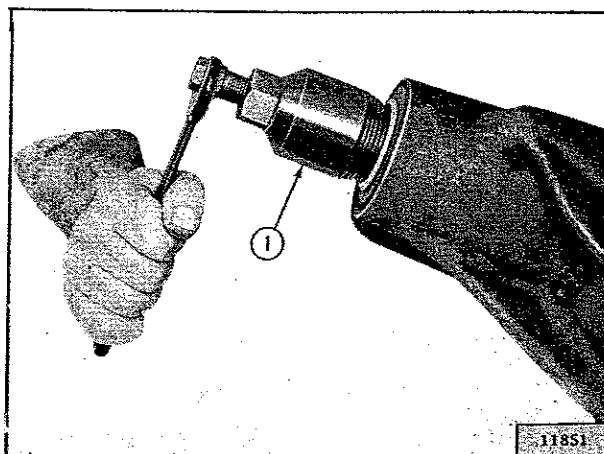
REMOVING PINION SHAFT OIL SEAL
